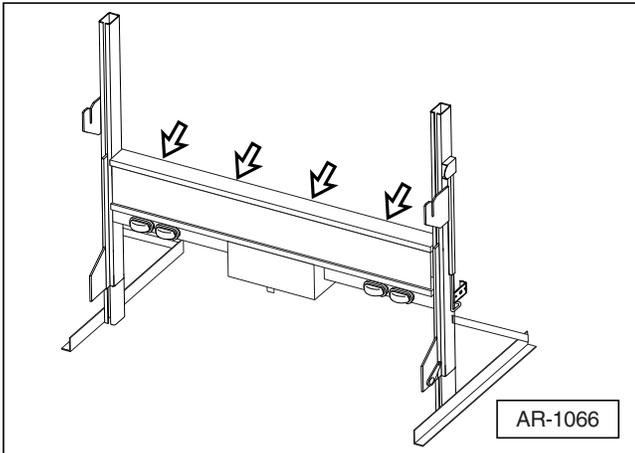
Drill four evenly spaced holes. (Platform not shown for illustration purposes.)
